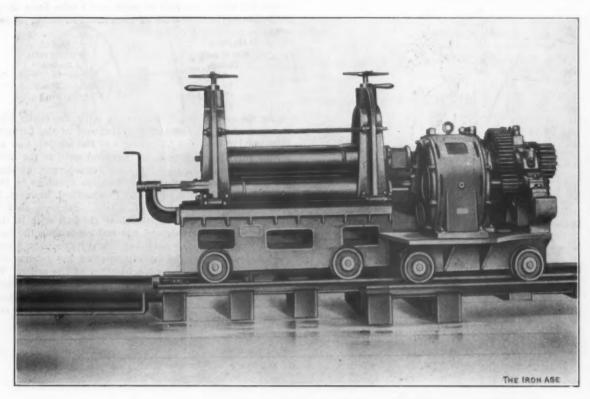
Movable Motor Driven Scarfing Rolls.
